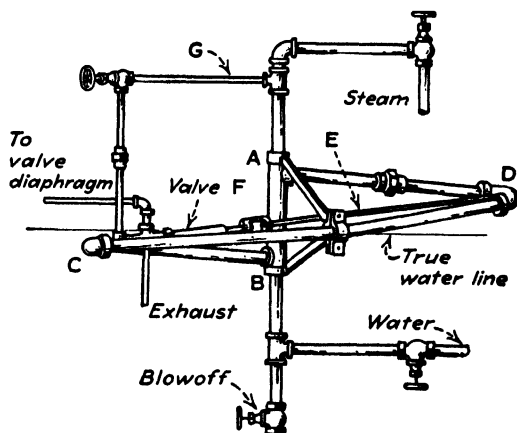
Harp-shaped thermostat tube uses boiler pressure to operate diaphragm-motor feed valve. (Courtesy of the C. E. Squires Co.)
